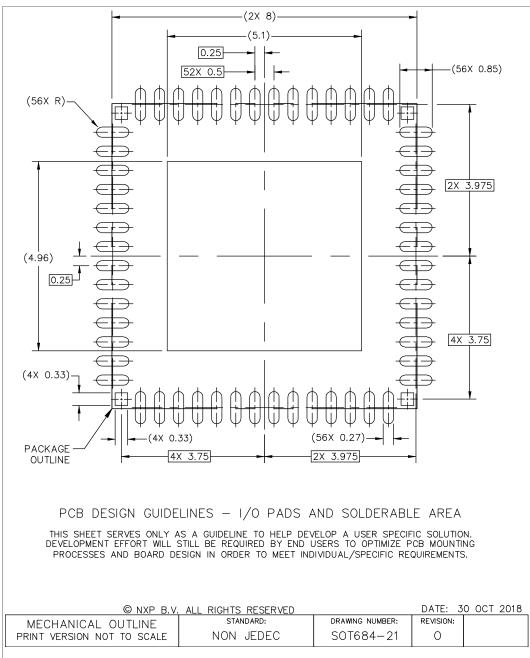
SOT684-21 Reflow soldering footprint - page 2
